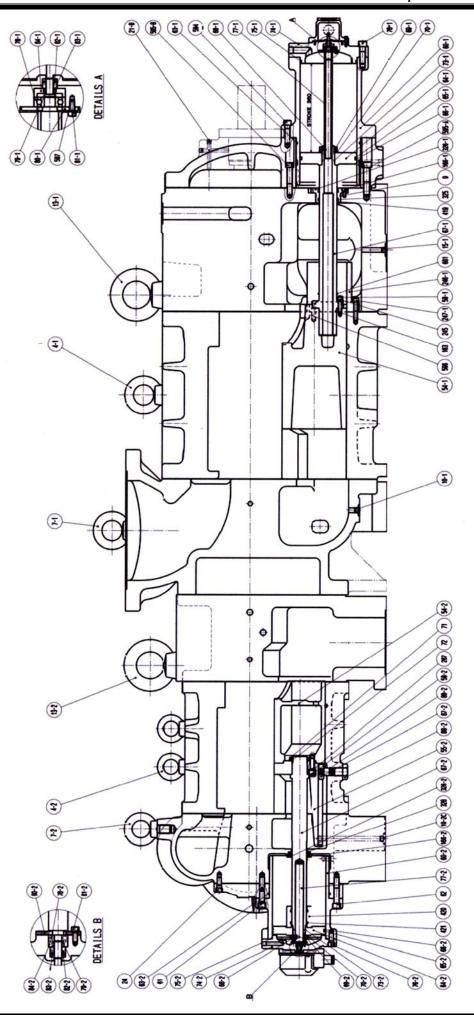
Assembly Longitudinal Section View (Example: 4032LLC)
